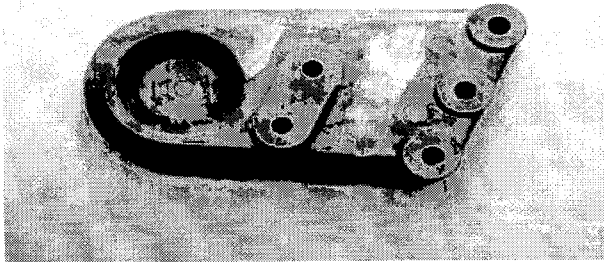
Photo of Engine Mountain Bracket trial manufacture
